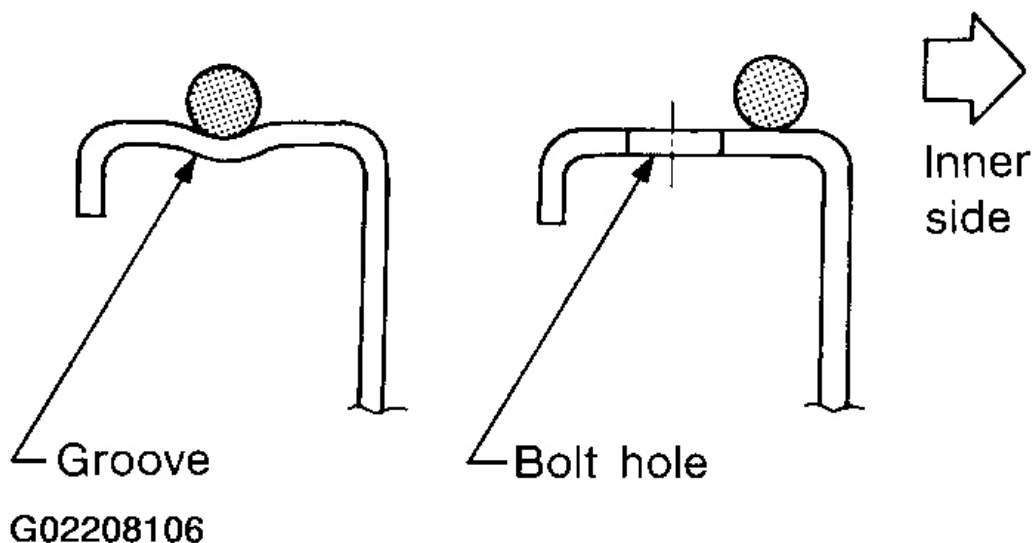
Applying Continuous Bead Of Liquid Gasket To Mating Surfaces
